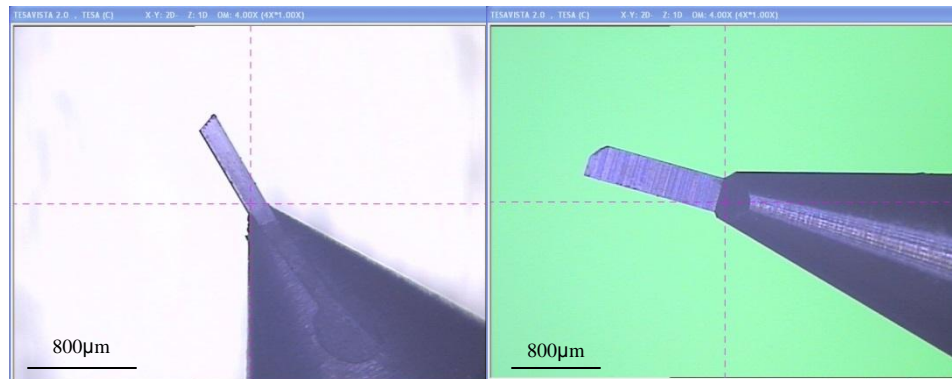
Single flute milling tool left: natural diamond; right: tungsten carbide
